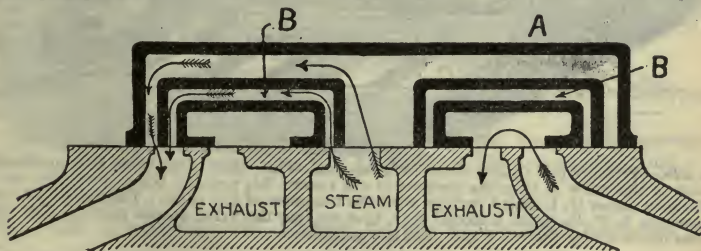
Valve of the Russel engine (Giddings type). Steam enters in the center and exhausts through the two adjacent cavities. The action of each end of the valve is similar to that of the Allen valve; the course of the steam is indicated by the arrows. To prevent the live steam lifting the valve from its seat, needle ports (not shown) are used, one connecting the live steam space within the valve to the body of the valve chest, and the second connecting the exhaust with the chest.
